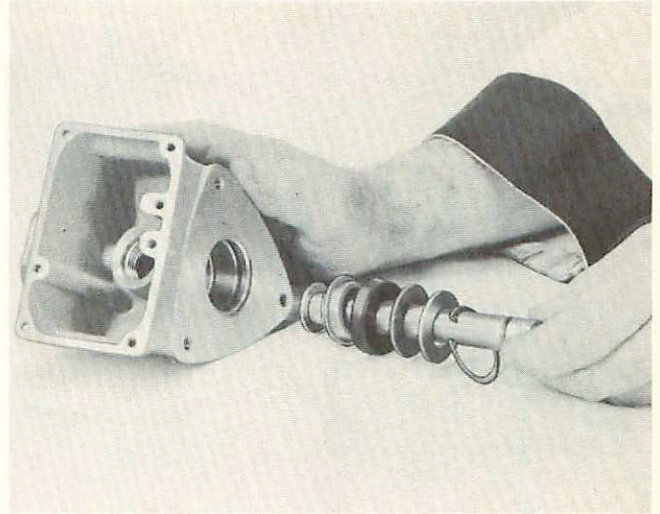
Piston and Details Removed from Hydraulic Cylinder
